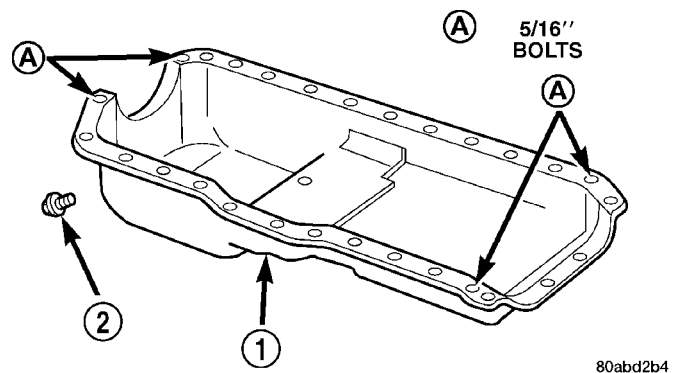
Position of 5/16 inch Oil Pan Bolts
